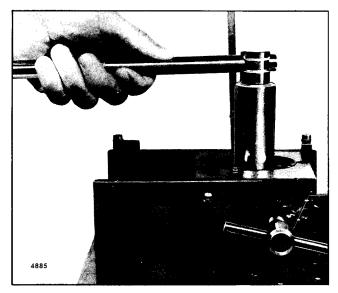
Removing Injector Nut using Tool J 4983-01
